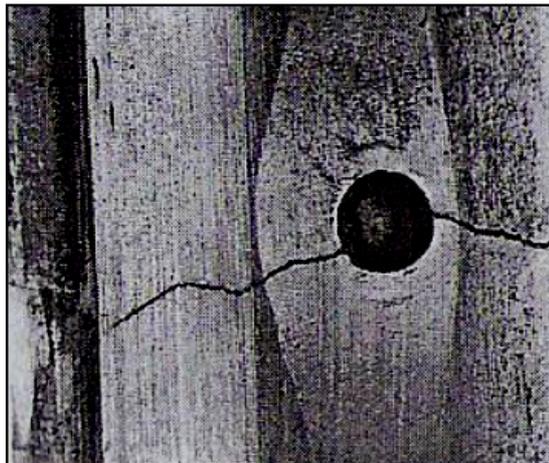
View of fatigue failure of a helicopter blade
